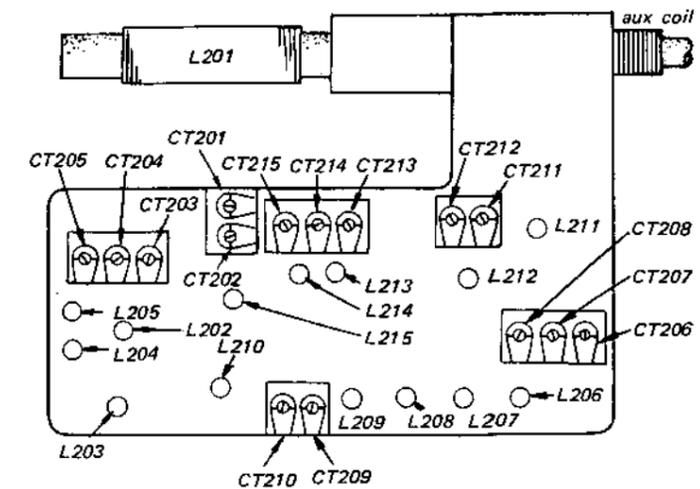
Adjusting parts location, cp circuit board - conductor side view -
